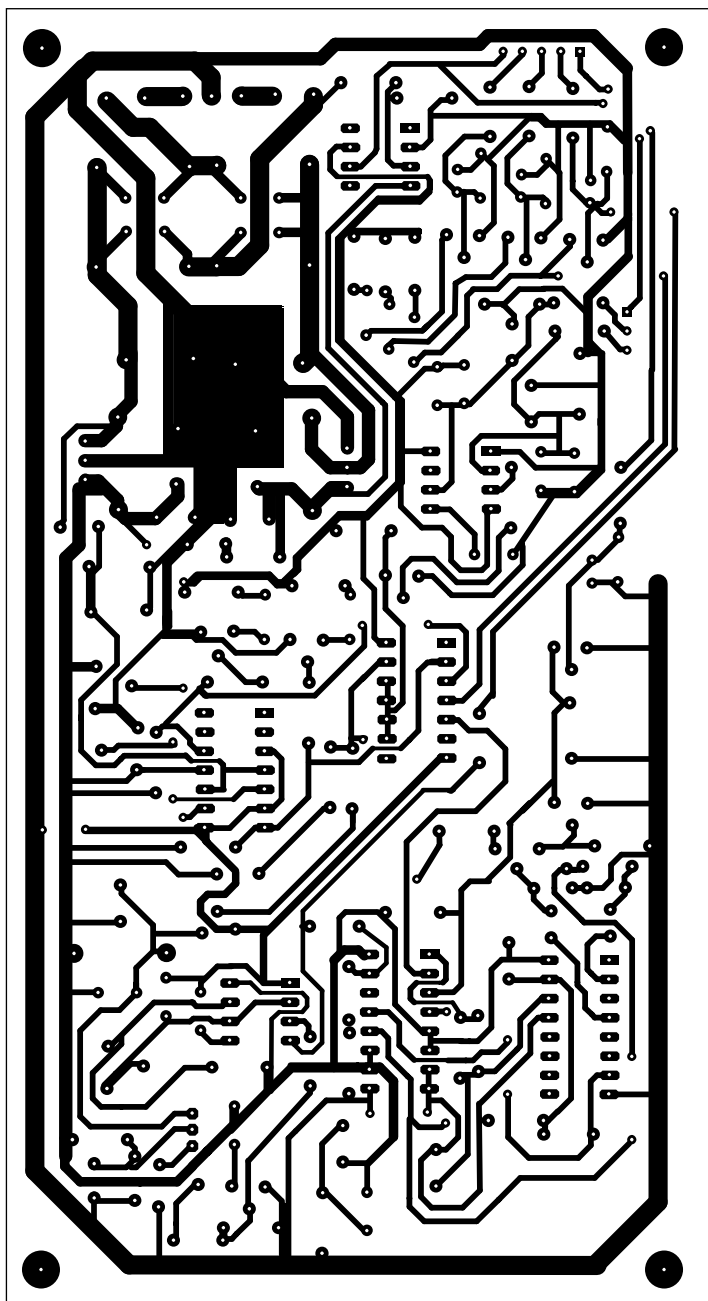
Actual-size, single-sided PCB layout for the circuit shown in Figs 1 and 2
